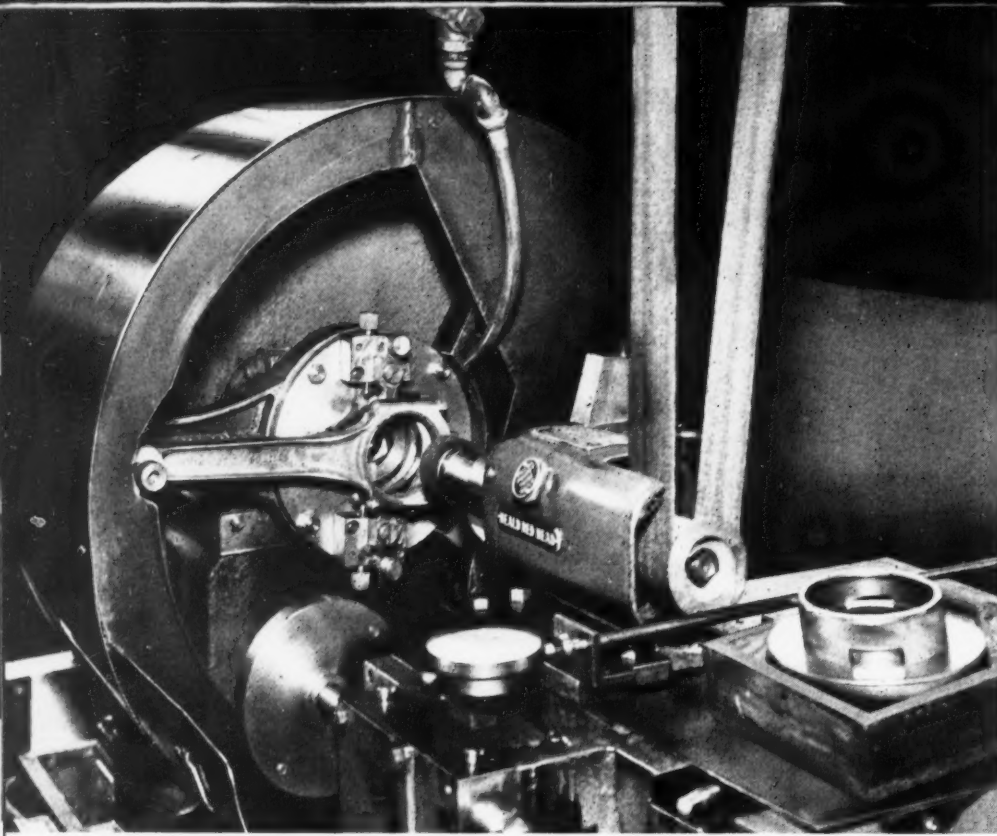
Grinding the Crankpin Bearings of a Connecting-rod in a Machine Equipped with a Dial Gage that Indicates the Progress of the Operation
